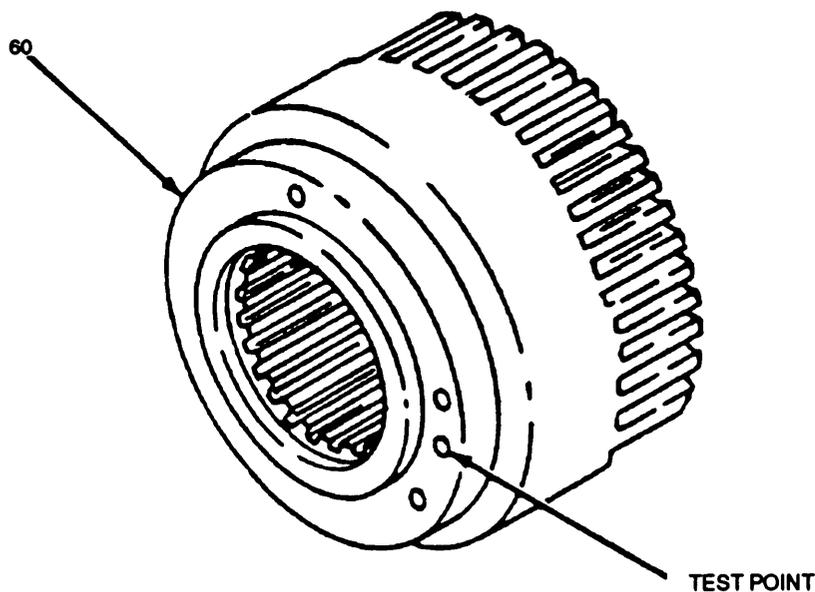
Winch Assembly Model PG-115-043R, Reassembly (Sheet 2 of 7).
